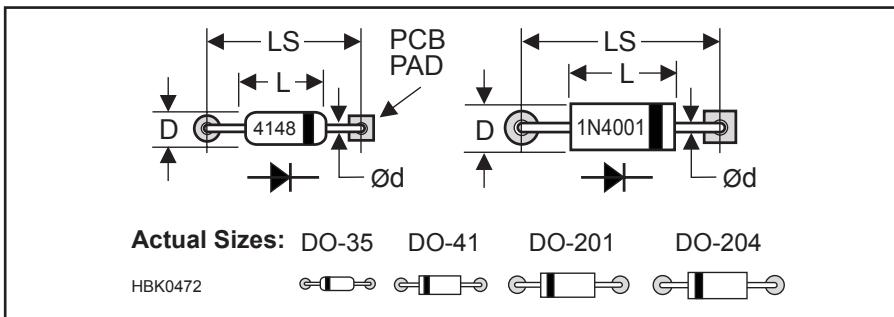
Axial-leaded diode packages and pad dimensions.
